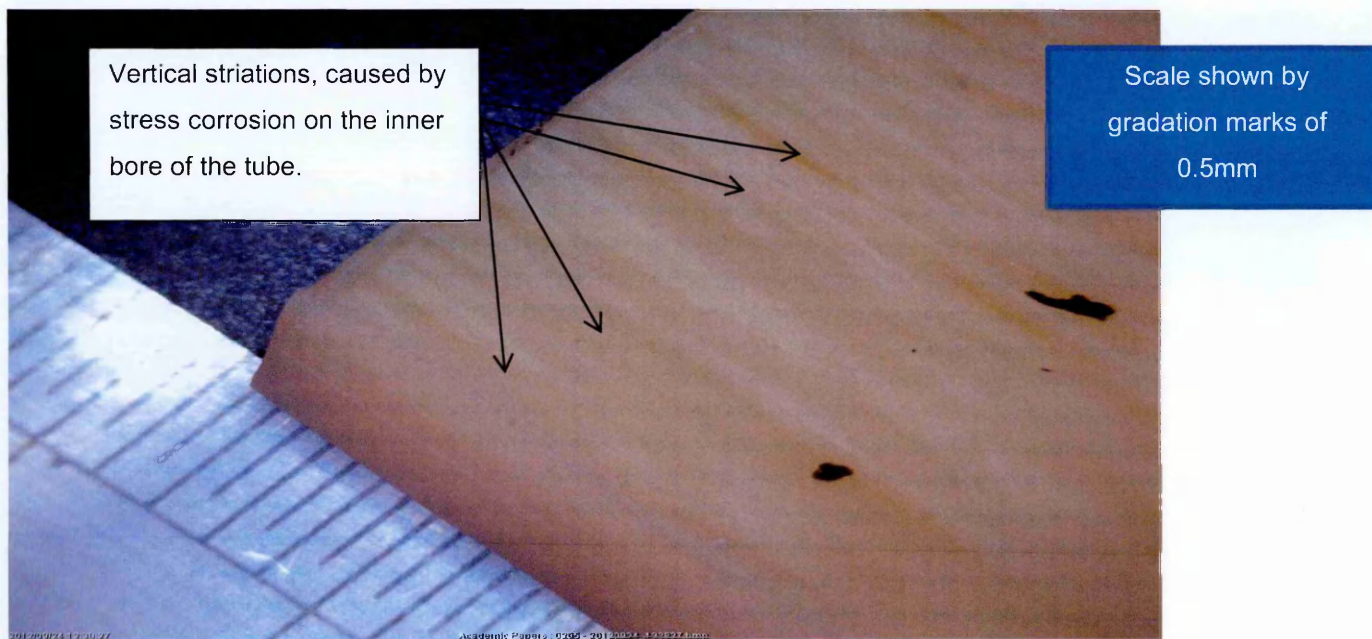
Stress Corrosion Damage for an EPDM/PP blend tube
